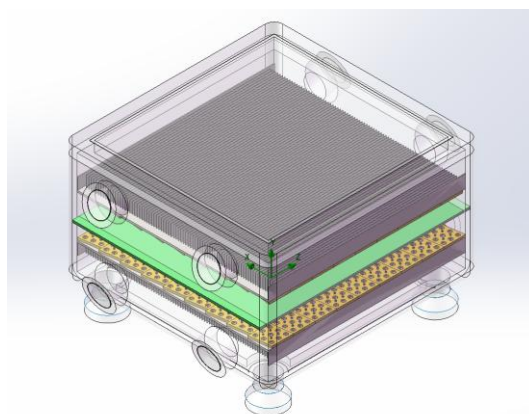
PCB Exposure Machine Equipped with Air-Cooling Heat Dissipation System
